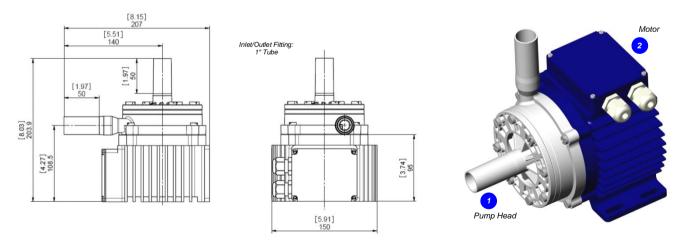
Basic dimensions of motor LPM-600.10 with pump head LPP-600.24
